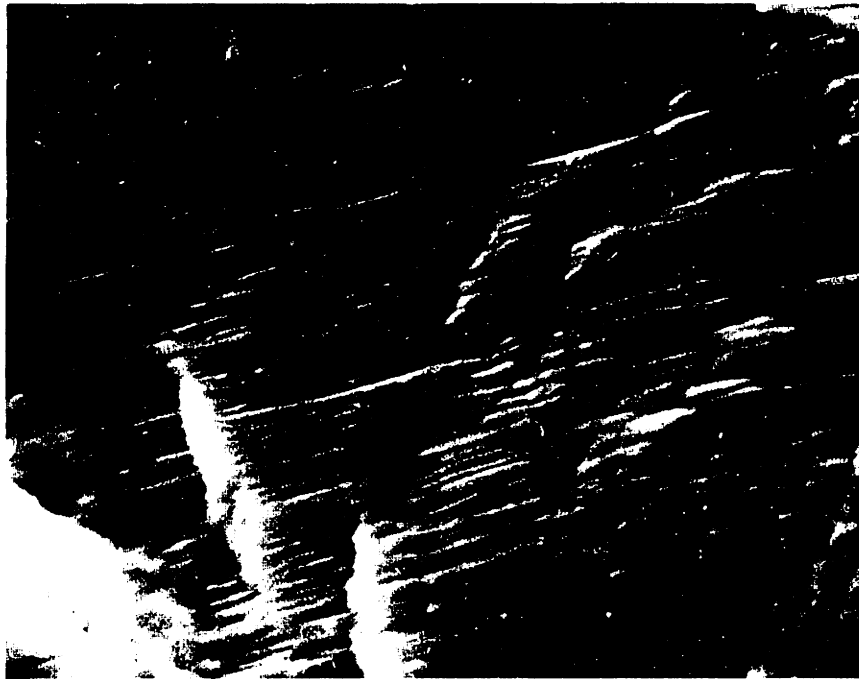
Fracture Surface of Desensitized Alloy-600 Showing Fatigue Striations, 10000X. Crack Path from Bottom to Top. ΔK Approximately 20 MPa \sqrt{m} .
